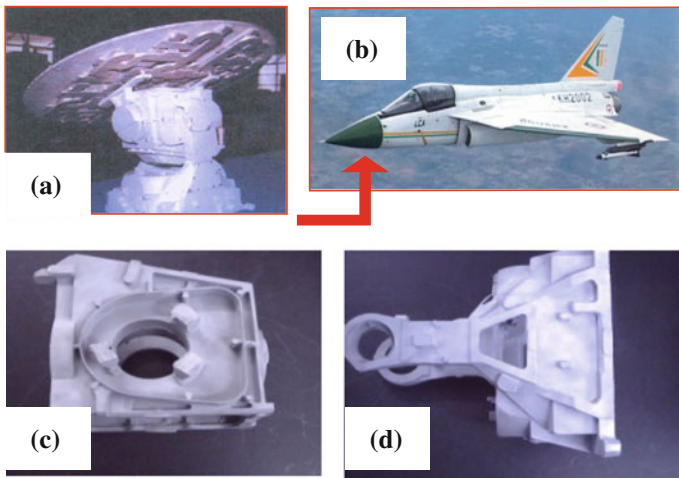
a APL assembly for b the LCA; c gimbal box and d pedestal unit castings of the APL
